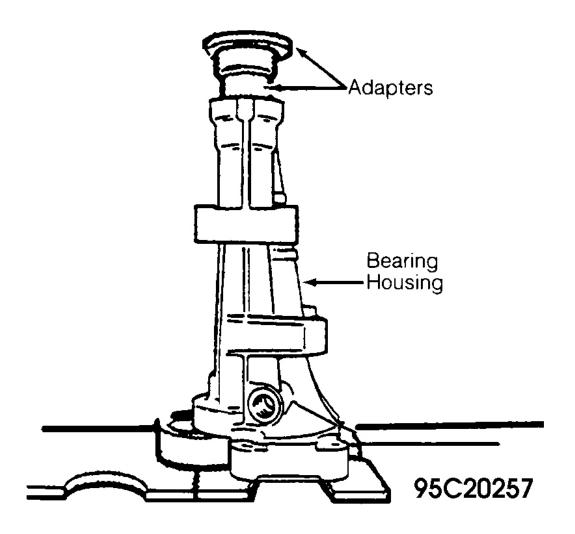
Installing Axle Needle Bearings Courtesy of VOLKSWAGEN UNITED STATES, INC.
